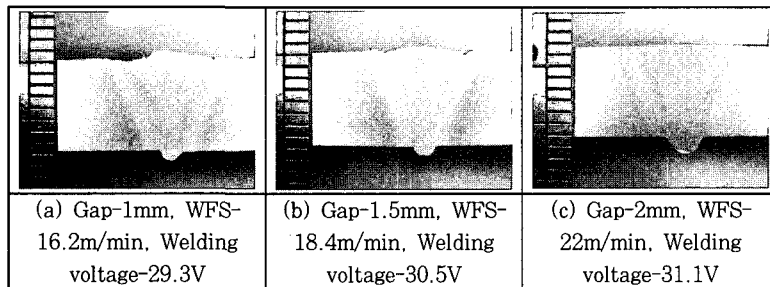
Cross-sectional bead shapes for butt welding with various joint gaps
